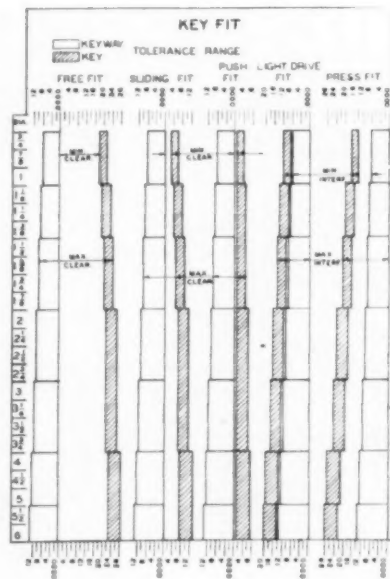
KEYWAY TOLERANCES FOR KEY FIT
